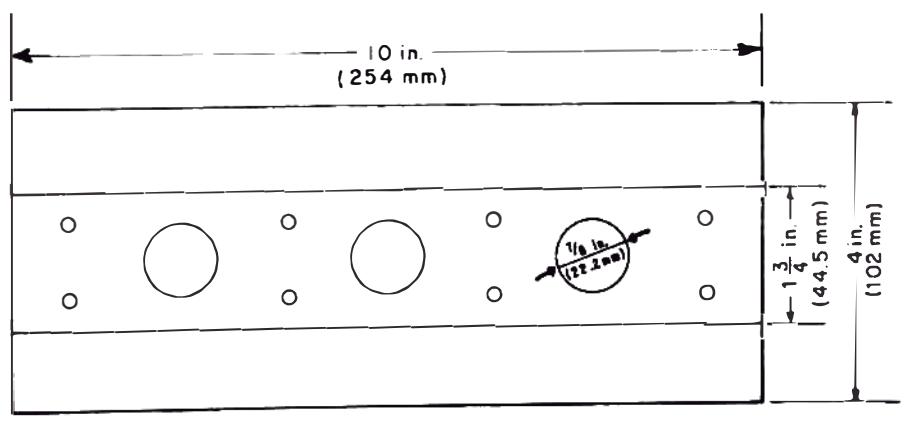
Sketch of Cover Plate for 2-in. (50-mm) Cube Mold
